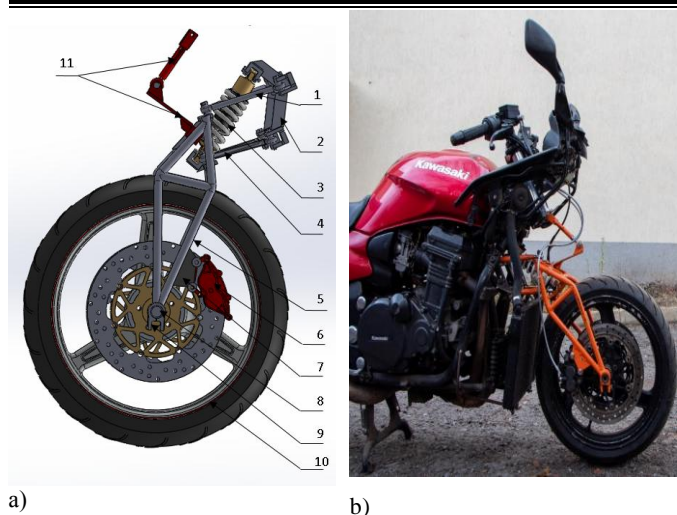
Assembled suspension type MULTILINK a – prototype, b – real type of suspension.
